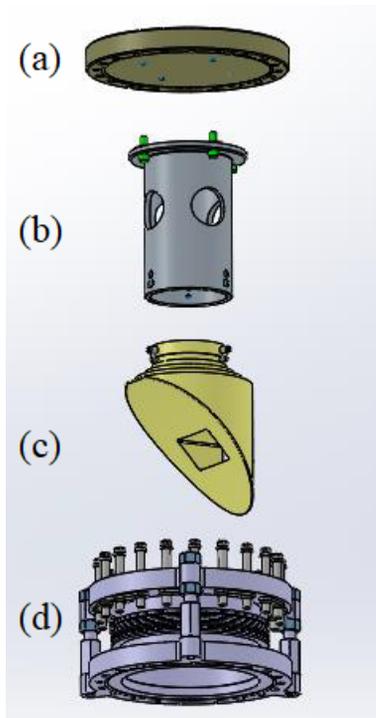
Exploded view of mirror assembly principal components [14]. (a) Mirror holder flange. (b) Mirror holder. (c) Toroidal mirror with rectangular clear aperture. (d) Vacuum bellows.
